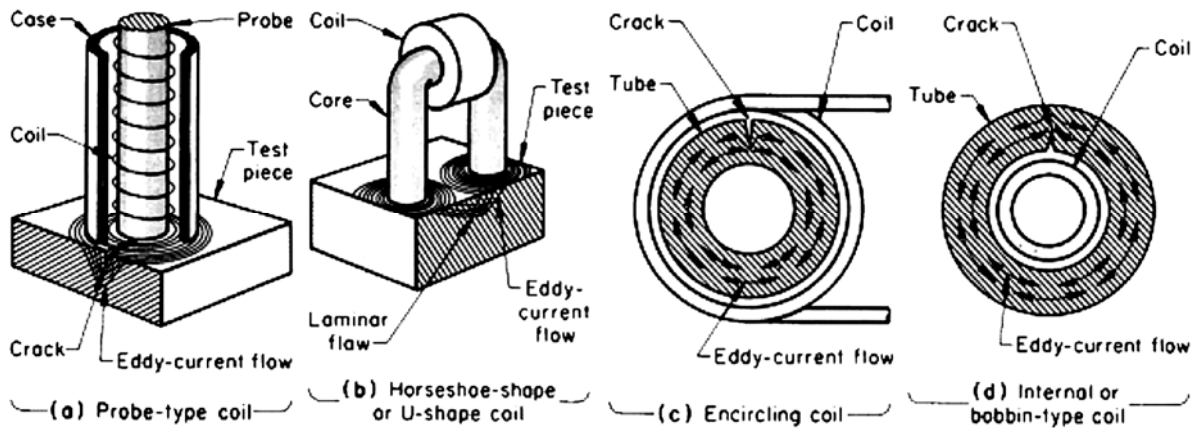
Types and applications of coils used in eddy current inspection: (a) Probe-type coil applied to a flat plate for detection of a crack. (b) Horseshoe-shaped or U-shaped coil applied to a flat plate for detection of a laminar flaw. (c) Encircling coil applied to a tube. (d) Internal or bobbin-type coil applied to a tube.
